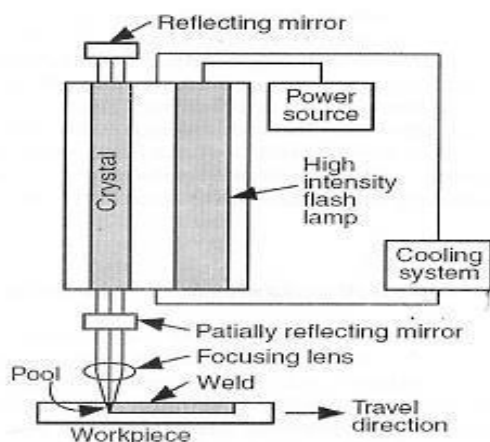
Laser Beam Welding (LBW) process(1).
